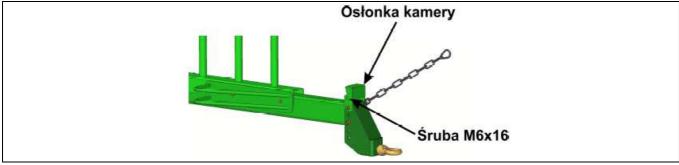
ATTACHING COUPLING ELEMENTS TO THE WRAPPING MACHINE
